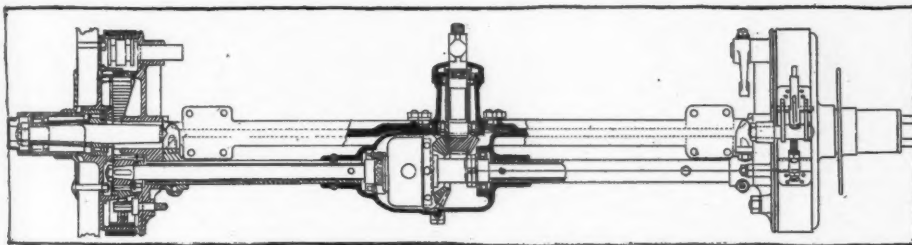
TORBENSEN INTERNAL GEAR DRIVE AXLE
